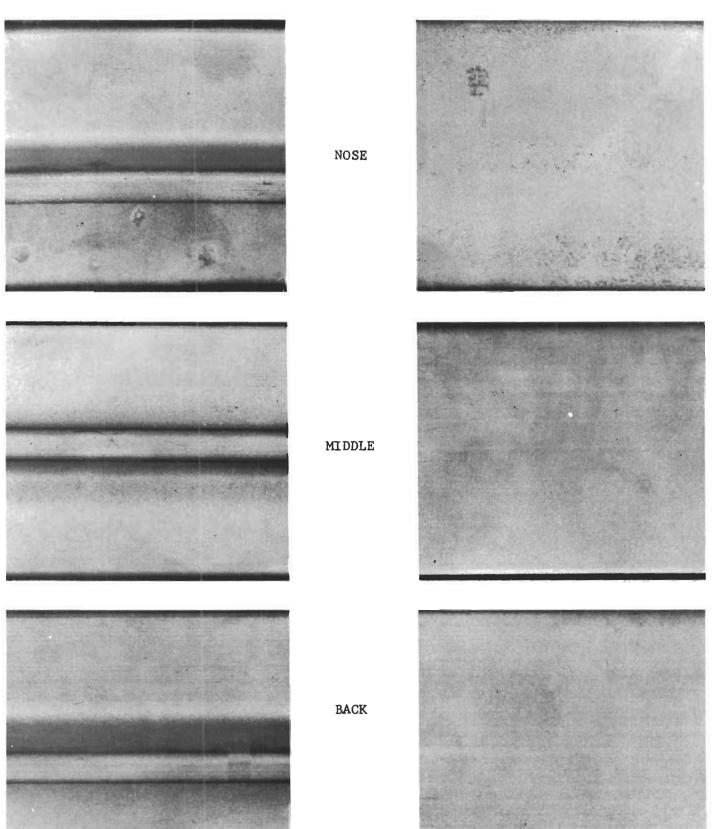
As-Extruded Surface of Pressed and Sintered Tungsten-3 Percent Molybdenum Extrusion 33 (Billet Code SW11)
